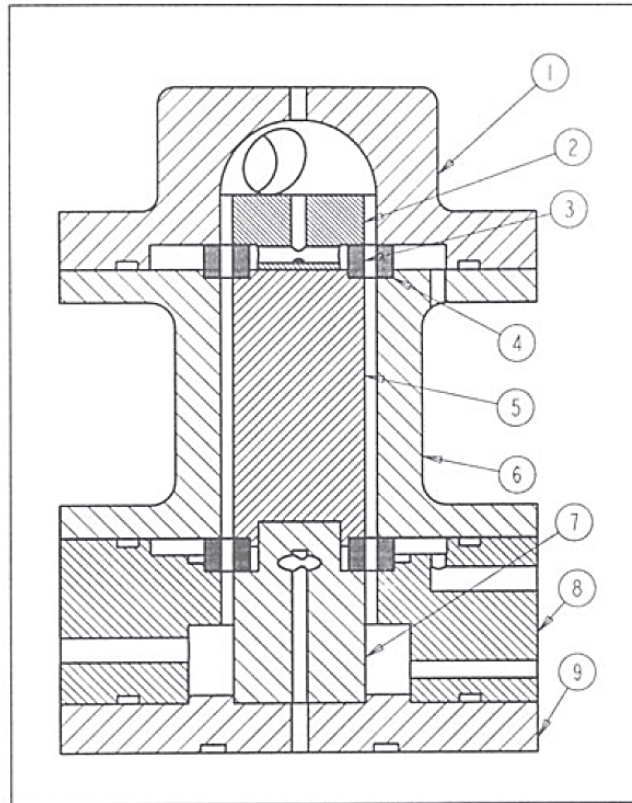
Collimator type column [30]. (1) and (2) outer and inner parts of the top, (3) and (4) sintered elements, (5) and (6) inner and outer parts of the enrichment section, (7) and (8) inner and outer parts of the stripping section and (9) bottom (heating plate).
